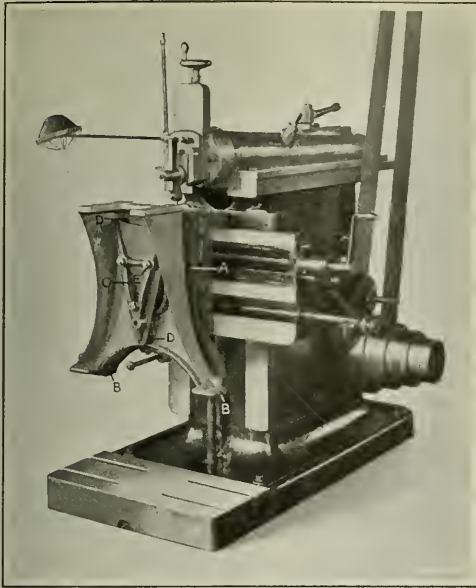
Shaper equipped for a Short Planing Operation on the Legs of an Engine Lathe
